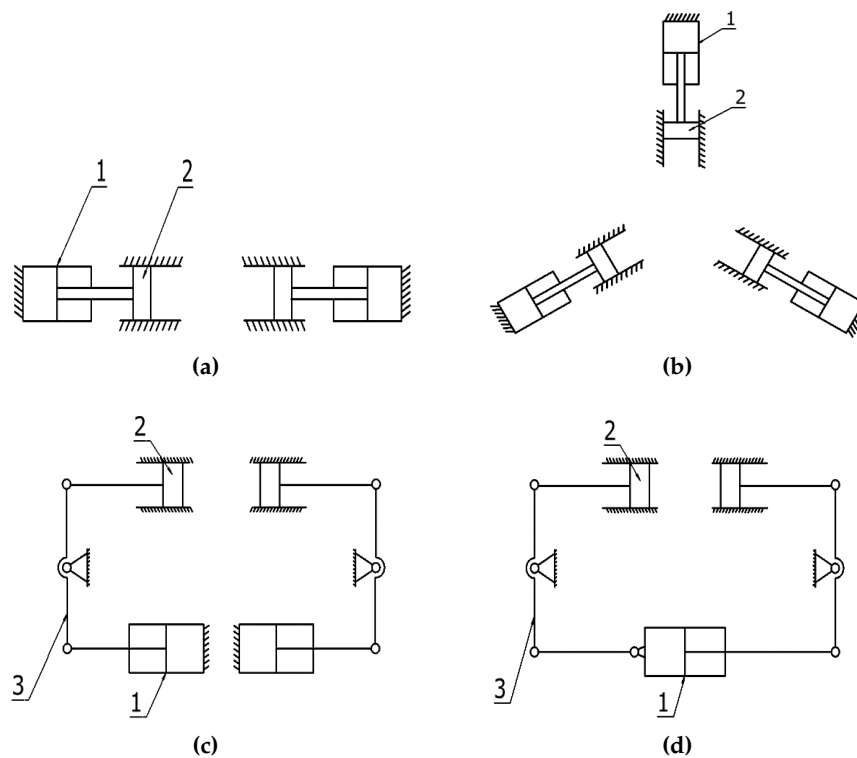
Main forms of clamping mechanism.1.hydraulic cylinder;2.clamping clamp;3.connecting rod.
